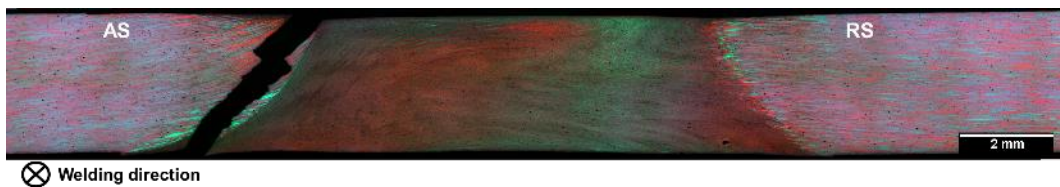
Fracture location and shape observed by optical microscope in welding direction of AA2196 sample welded by SSuBT-FSW LEW. All AA2196 samples welded by SSuBT-FSW in LEW and HEW presented fracture mode II.
